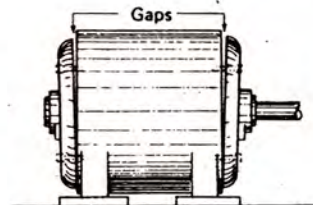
A motor showing end plates not mounted properly. This prevents the rotor from turning. Use a mallet to tap plates into position.
